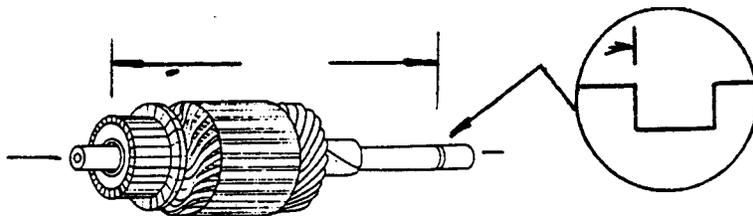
DIMENSION: COMMUTATOR TO SNAP-RING GROOVE
